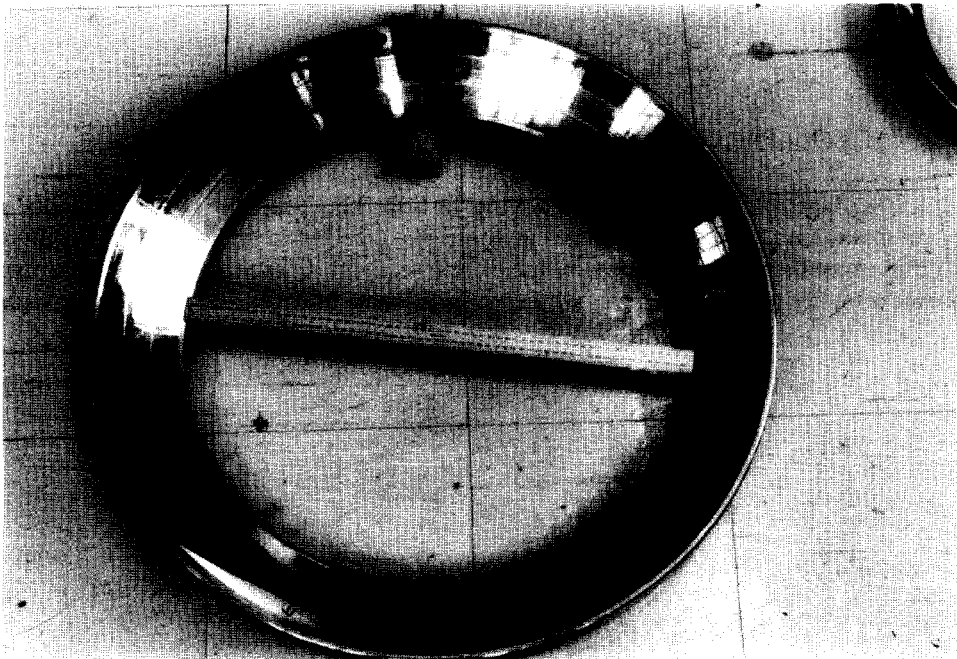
Thrust bearing cup showing highly polished surfaces typical of the initial stages of rolling contact fatigue.
